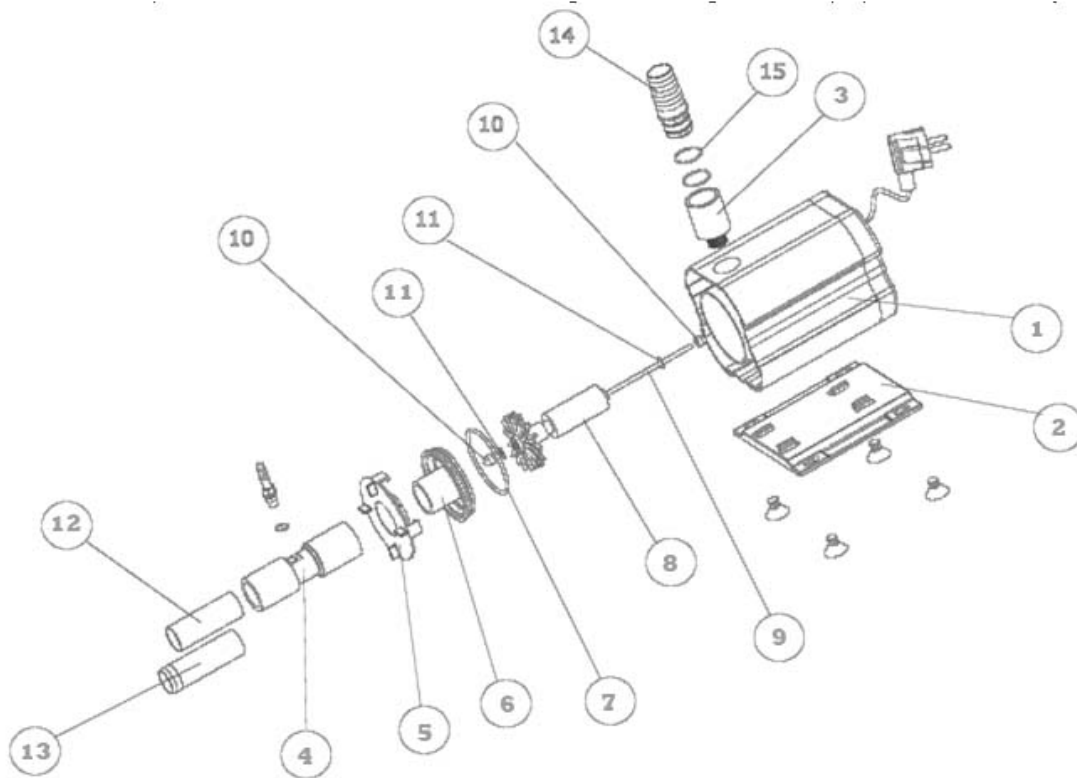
Exploded parts diagram Ocean Runner 2500 incl. mesh wheel
